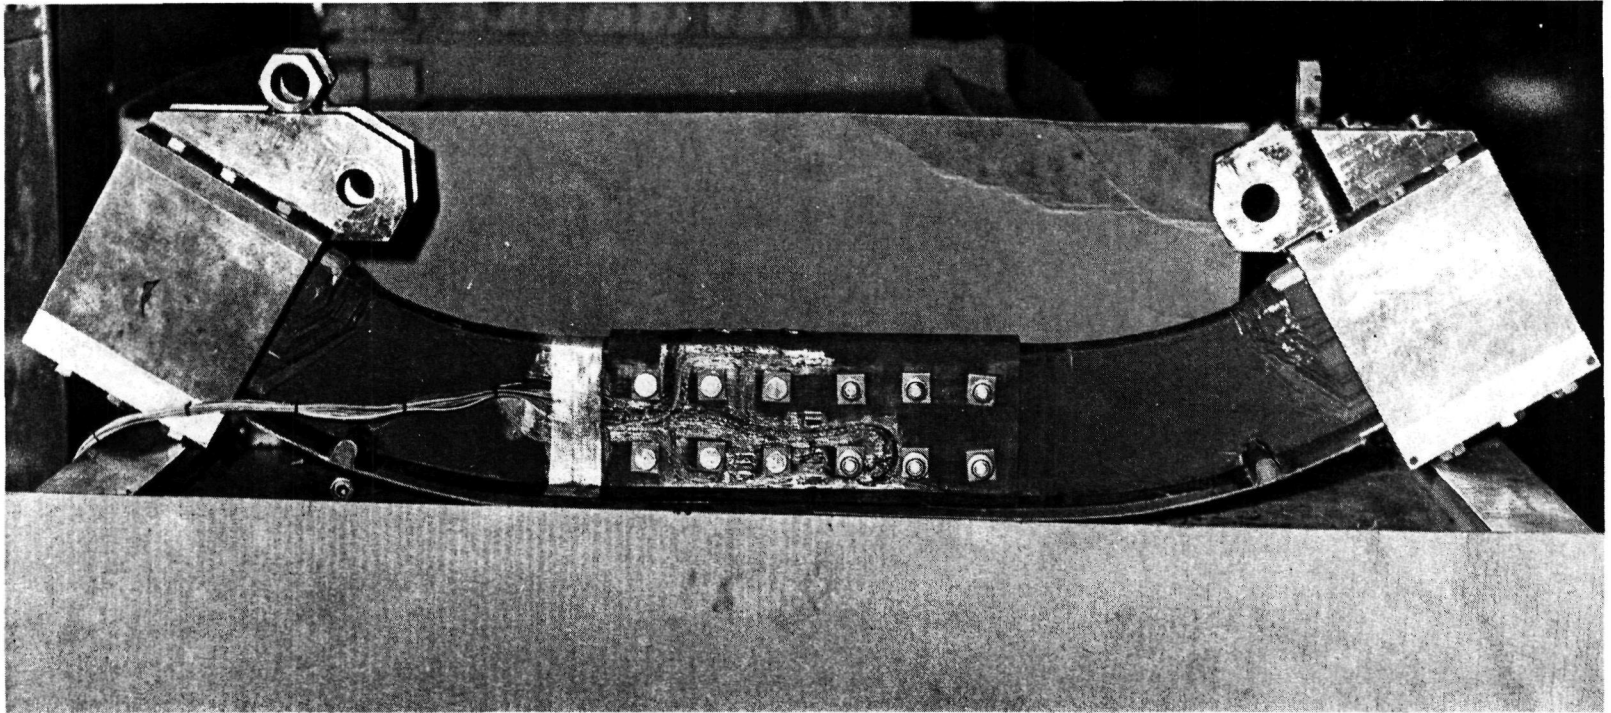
FRAME SPLICE JOINT SPECIMEN WITH TEST END FITTING INSTALLED.
